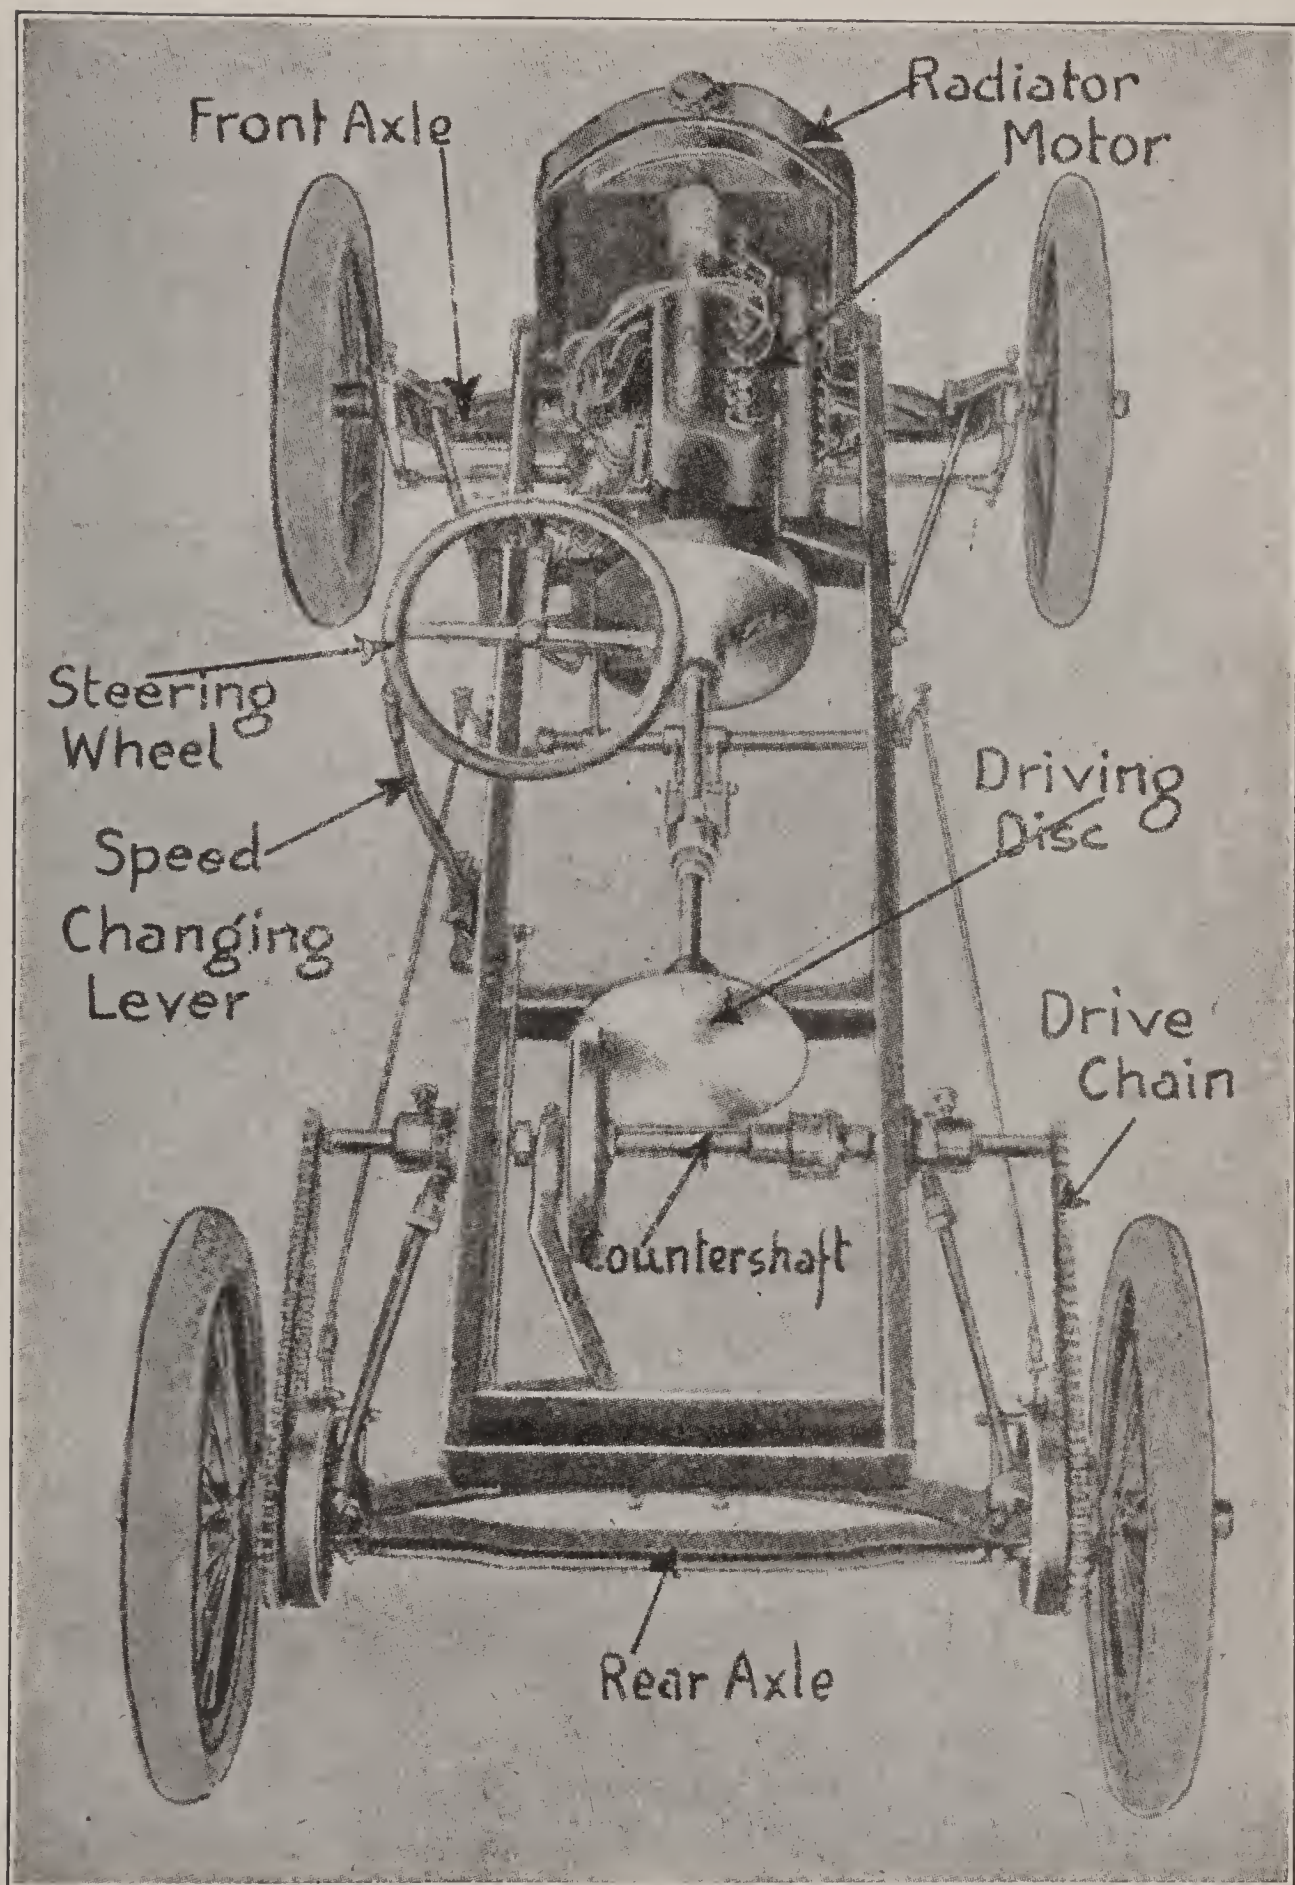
Plan View of the Trumbull Light Car Chassis, Showing Friction Change Speed Gearing and Double Side Chain Drive,
